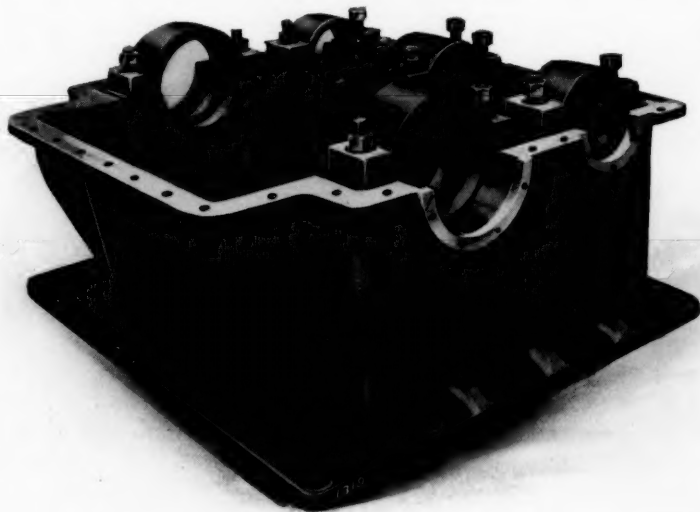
GEAR CASE OF DE LAVAL GEARED TURBINE-DRIVEN CENTRIFUGAL PUMPING UNIT
